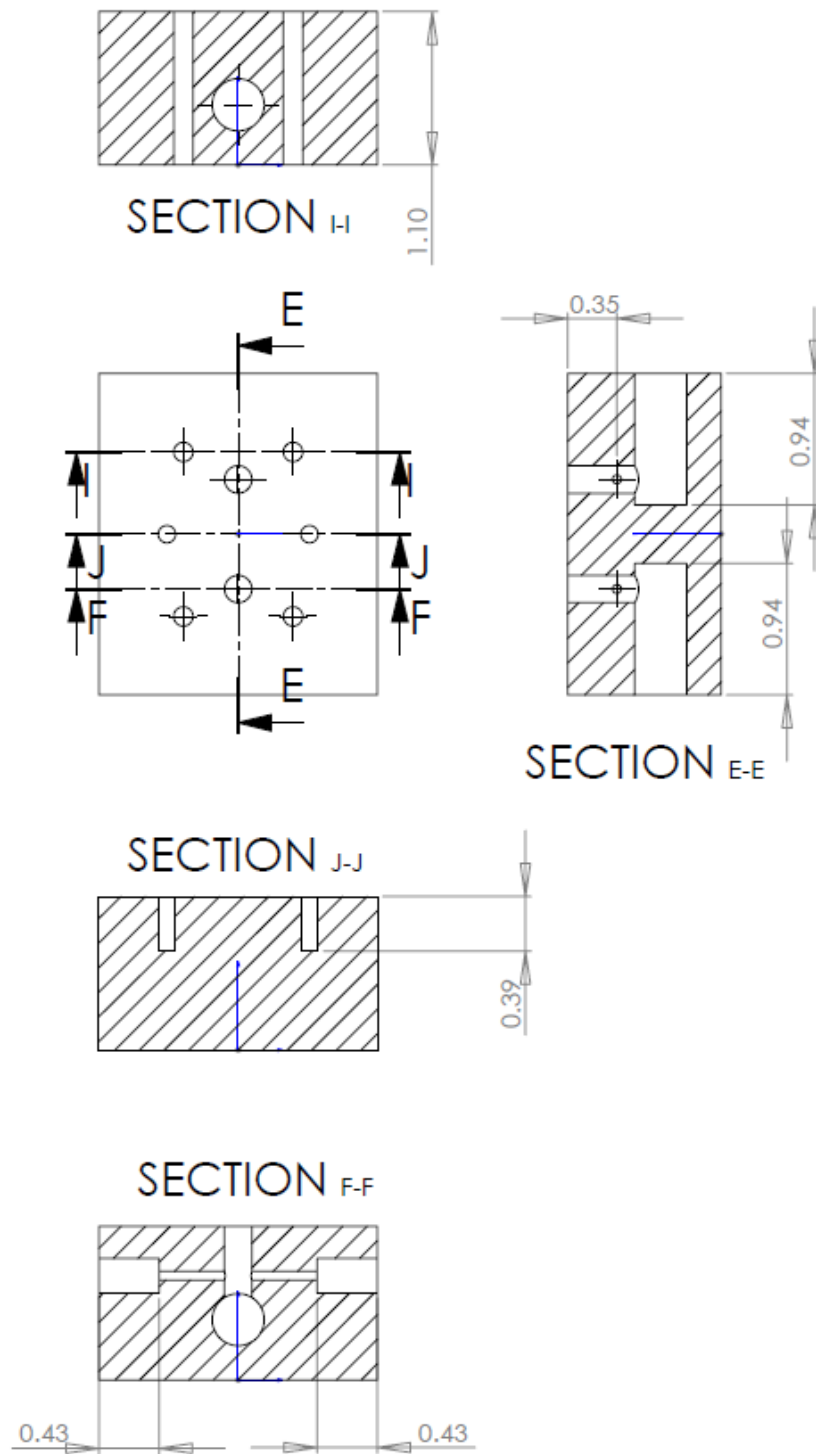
Technical drawings of the manifold base; all dimensions in inches unless otherwise specified.
